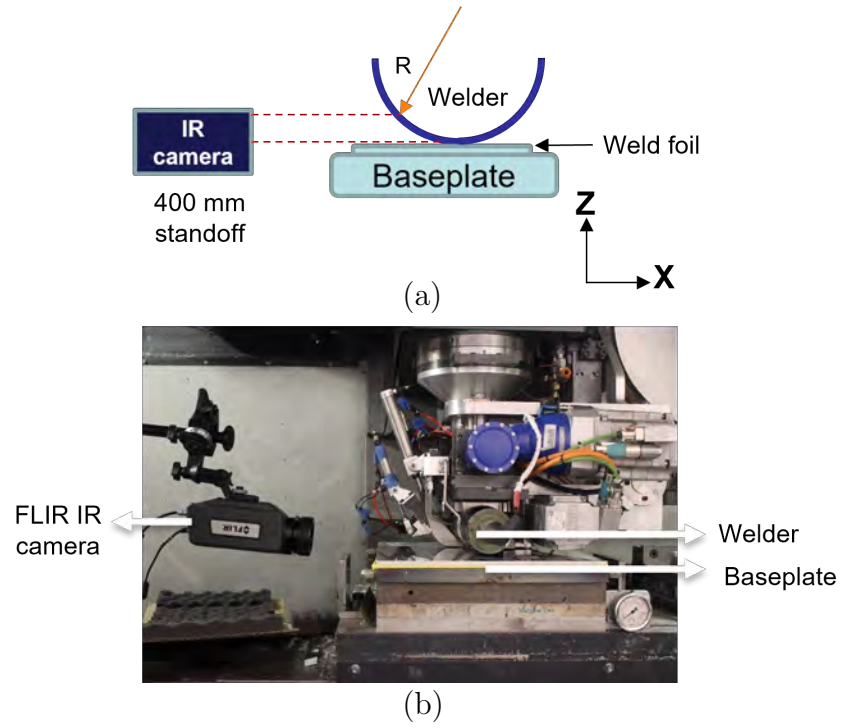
Setup to measure the weld temperature during UAM in-situ: (a) illustration of the IR camera positioned to view the front of the welder during welding; (b) image of the FLIR A6751sc camera positioned using a Manfrotto boom arm.
